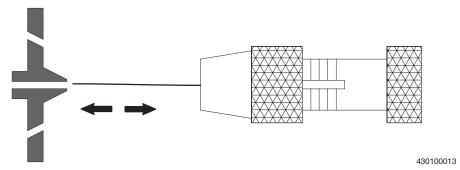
Correct direction to insert a pin-type probe into a spray nozzle (CF nozzle disk shown)
